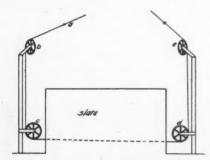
Essential parts of wire saw equipment: (a) wire; (b) and (e) orienting pulleys; (c) and (d) guide pulleys
